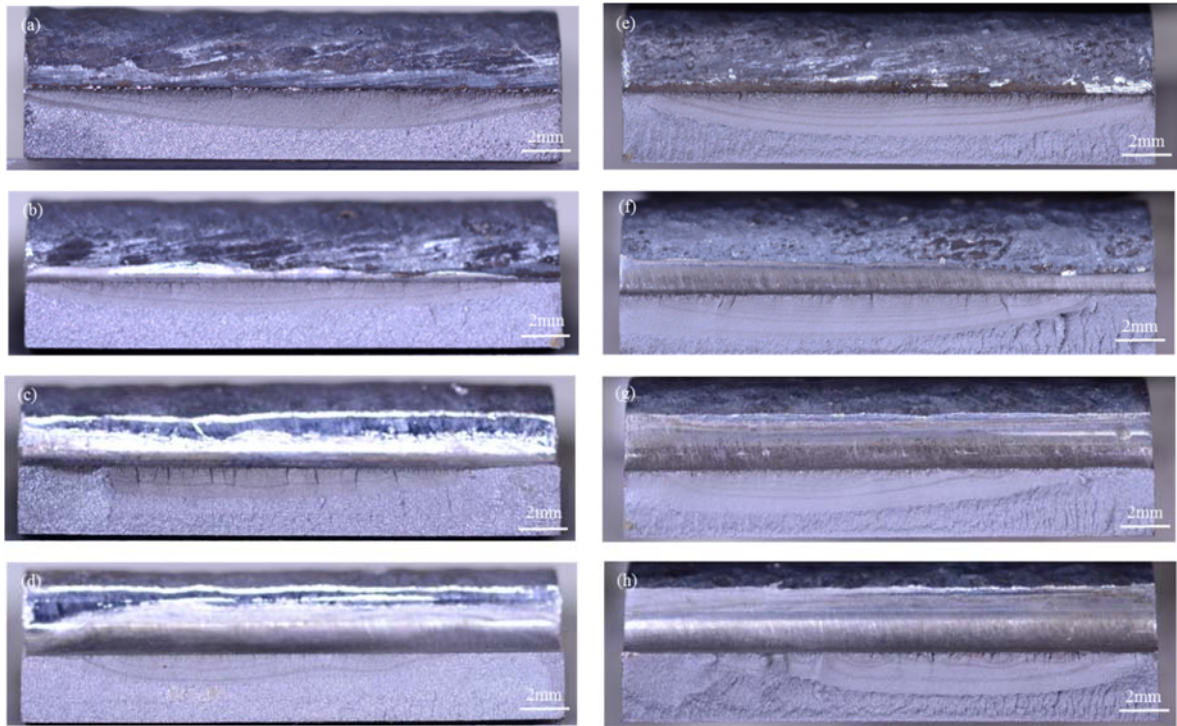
Beach marks on fracture surfaces. (a) As-welded 440FP joint, (b) toe machined welded 440FP joint with toe radius of 0.5 mm, (c) toe machined welded 440FP joint with toe radius of 1.0 mm, (d) toe machined welded 440FP joint with toe radius of 1.5 mm, (e) As-welded 980B joint, (f) toe machined welded 980B joint with toe radius of 0.5 mm, (g) toe machined welded 980B joint with toe radius of 1.0 mm, (h) toe machined welded 980B joint with toe radius of 1.5 mm.
